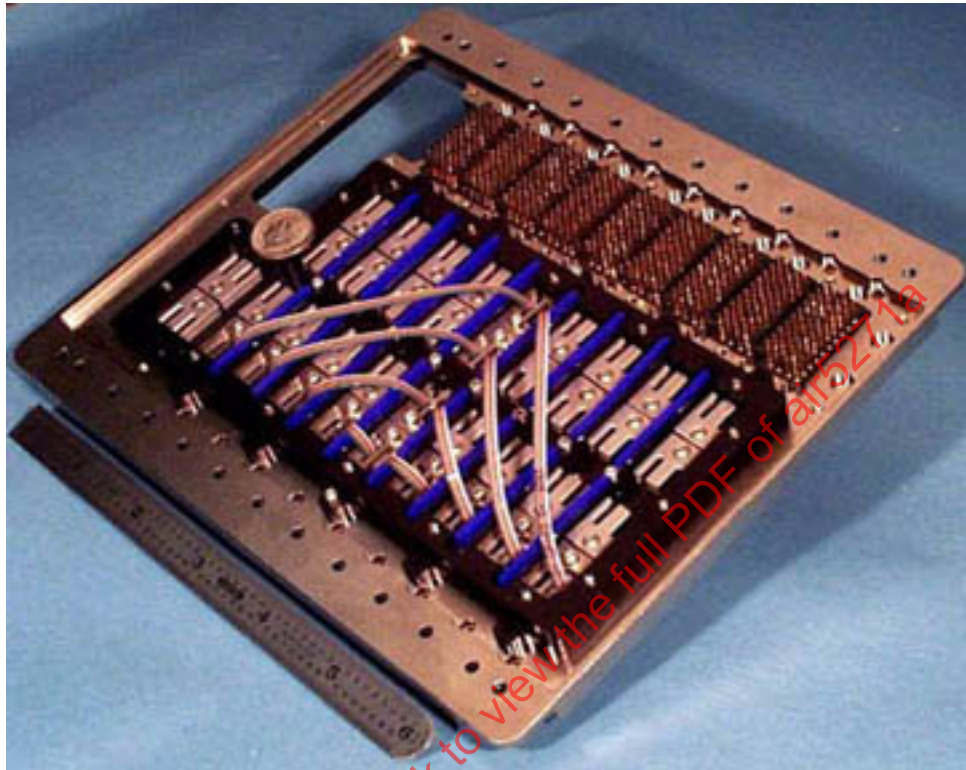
Optical Backplane Media Strips and Assembly (Courtesy Amphenol Corp.)
